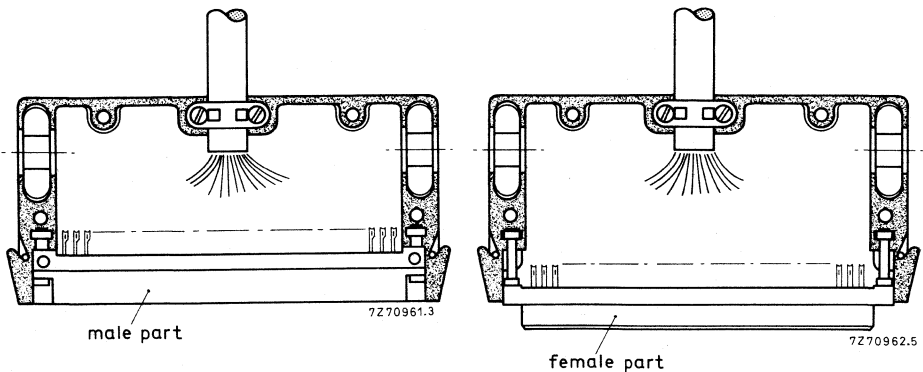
Fixing of cable to the hood and mounting of the hood to the connector part. Maximum permissible cable diameter is 11 mm (e.g. 96 insulated wires AWG30).
